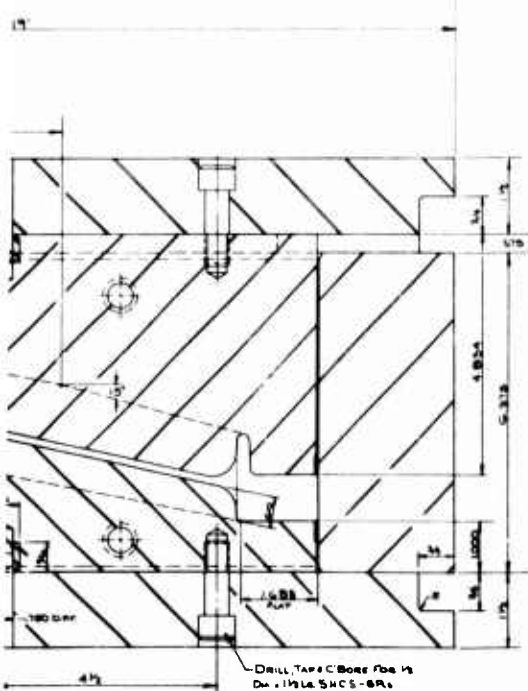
Design of Compression-Molding Tool for Aft Bell Crank.
